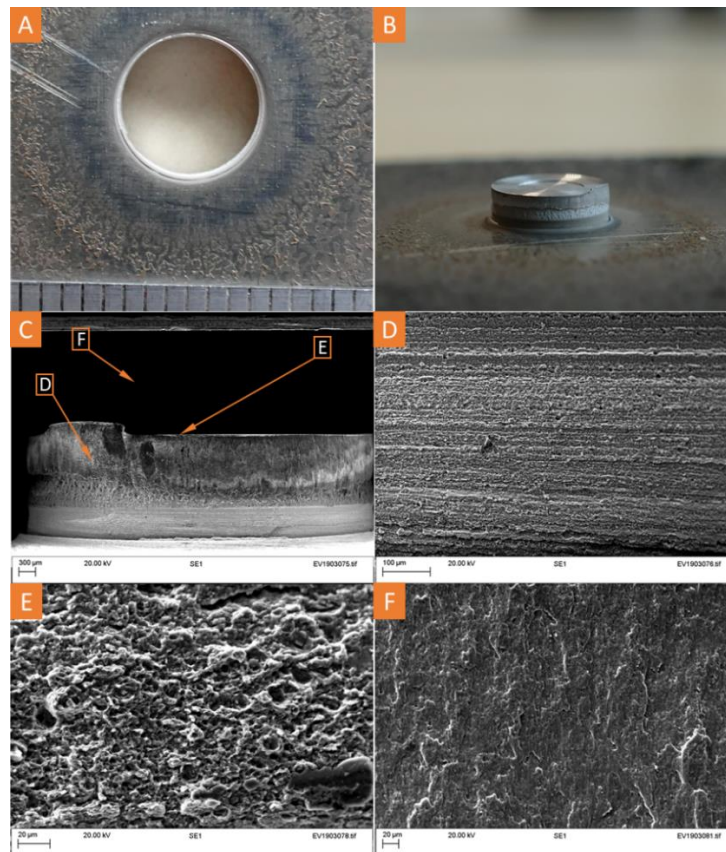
Fracture surfaces of a plug pull out top sheet failure mode of RFSSW AA7075-T6 condition W21 (RS = 1000 rev/min; PD = 2.4 mm) with sealant:
